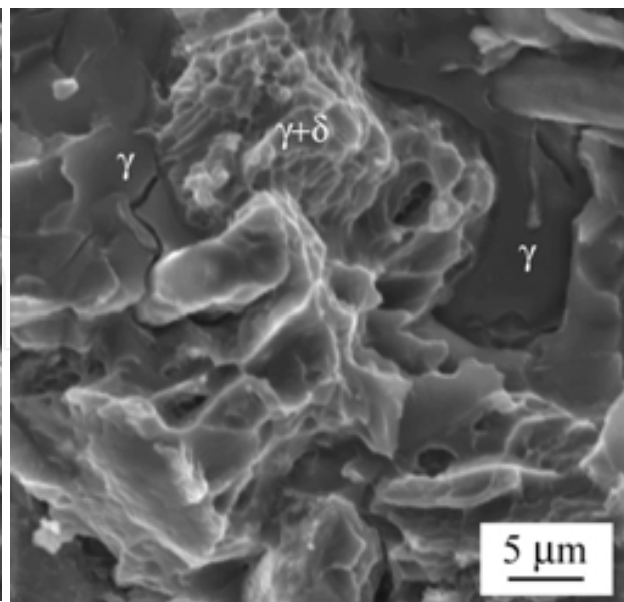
Fracture surface of AZ91h sample after impact test at 200 °C.
